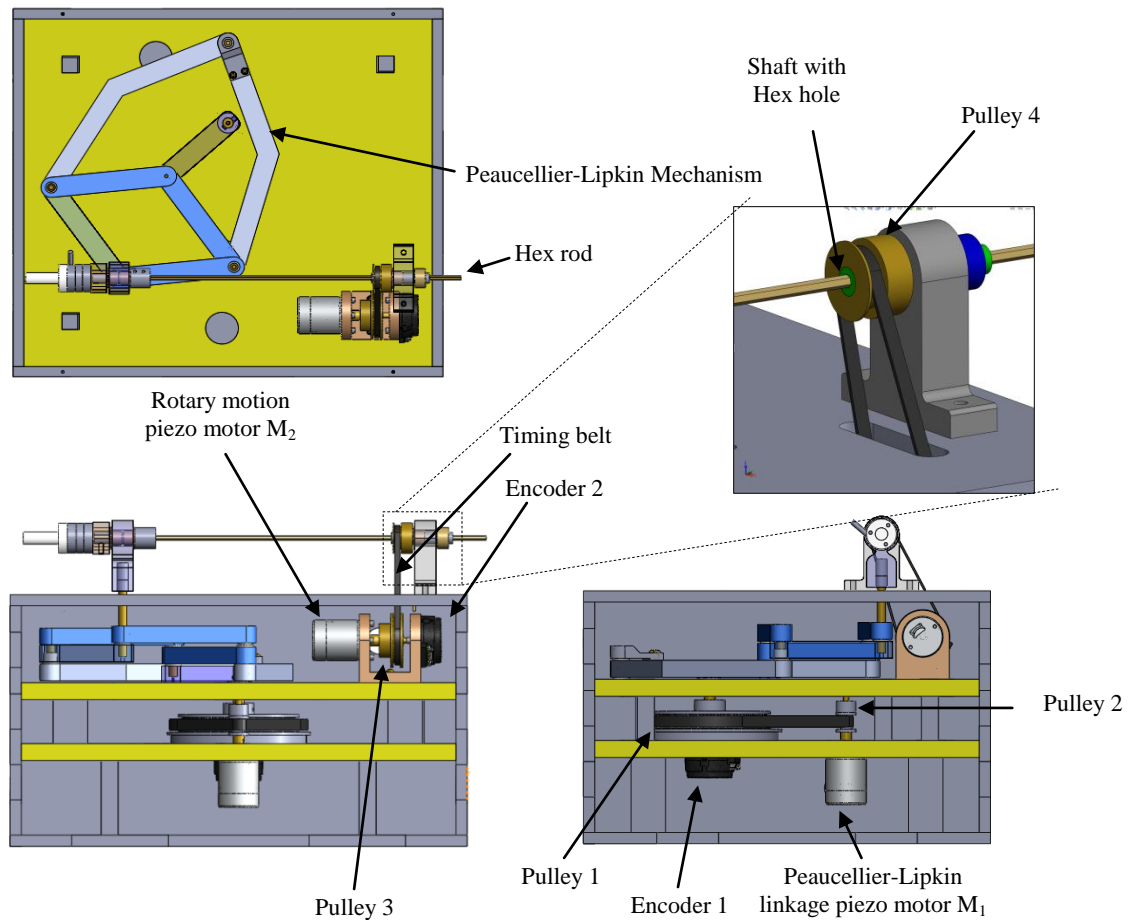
Top, front and side views of the master robot. The front and side views show the internal parts.
